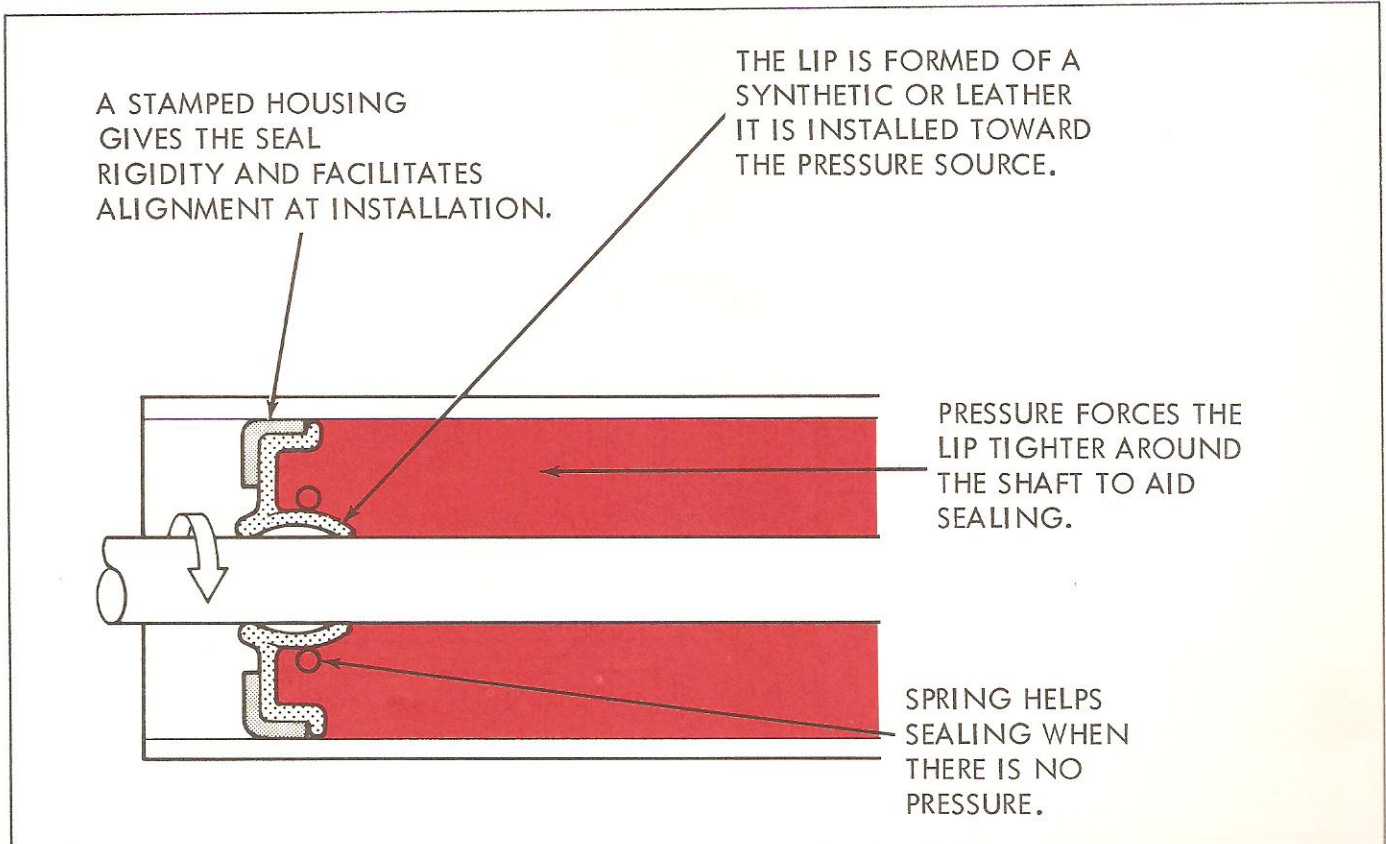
Lip Seals are Used on Rotating Shafts
